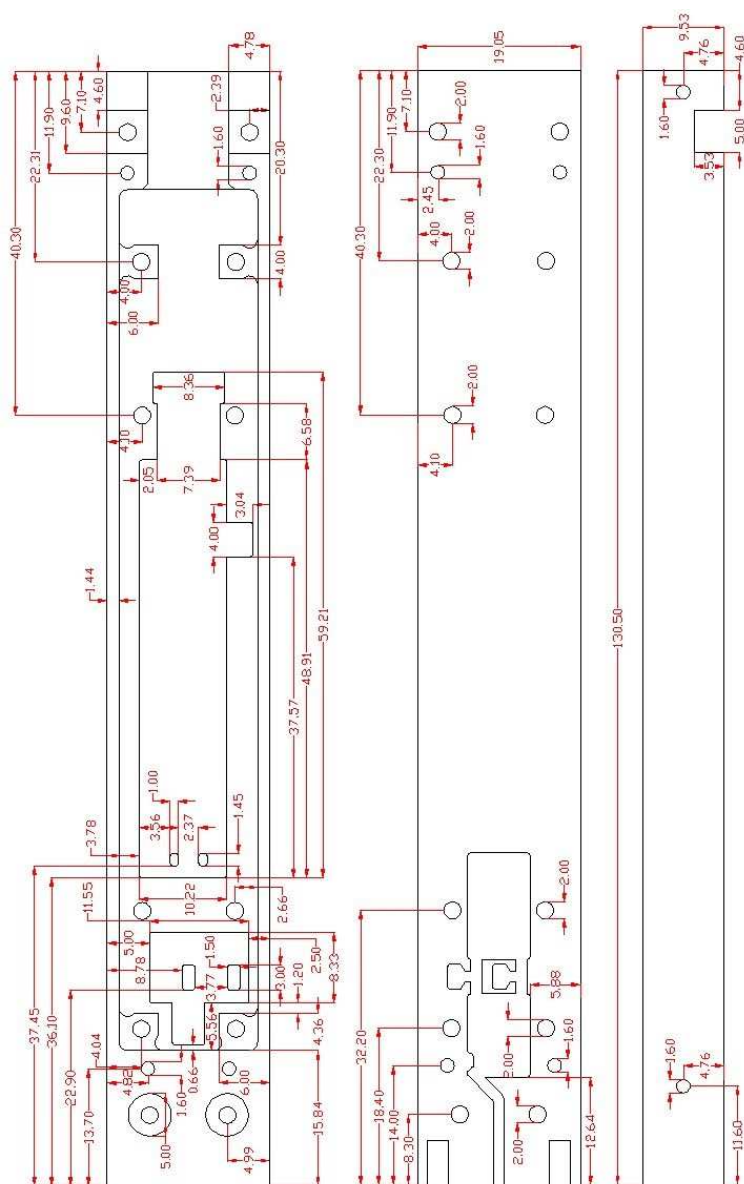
Views and dimensions (mm) of the top metal block of the packaging aluminium block.
